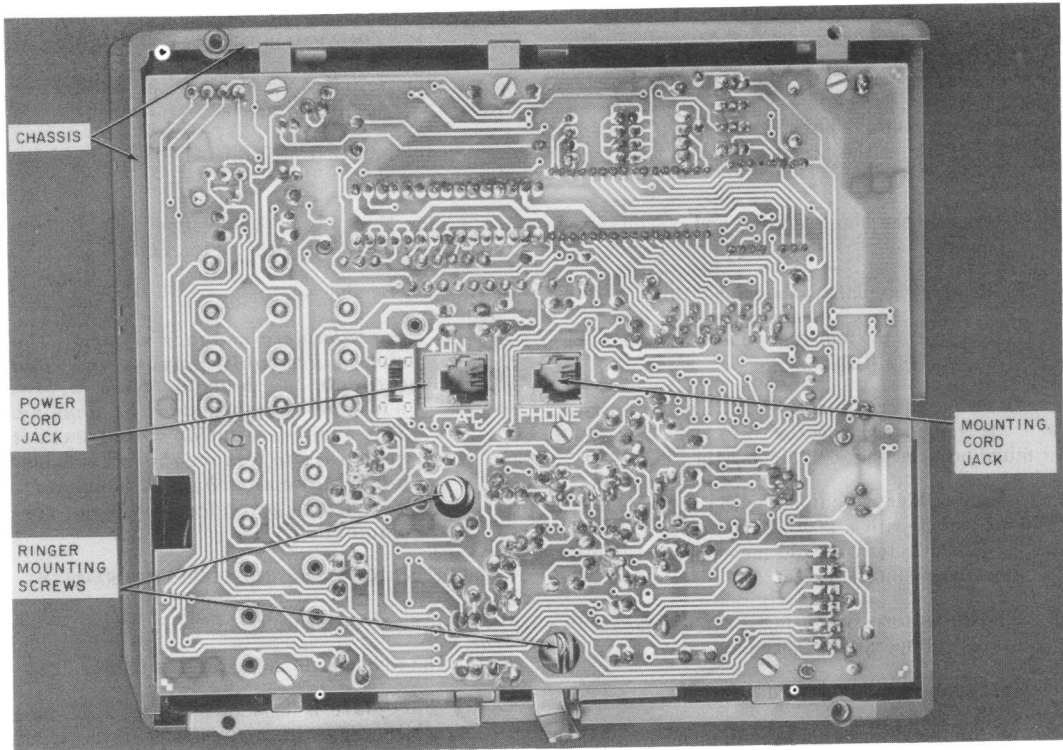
Bottom View of Power Supply Board (Lower Housing Removed)
